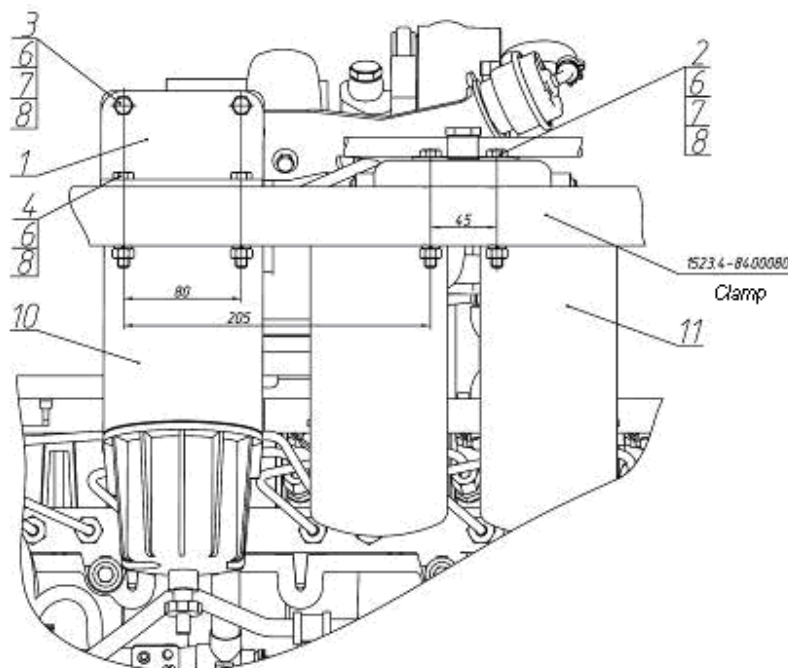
Mounting engine (Deutz) on tractor BELARUS 1221.4
